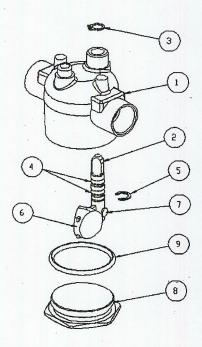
Schneider Electric PopTop 2-Position Valve Body Components (Shown: 2-Way).
